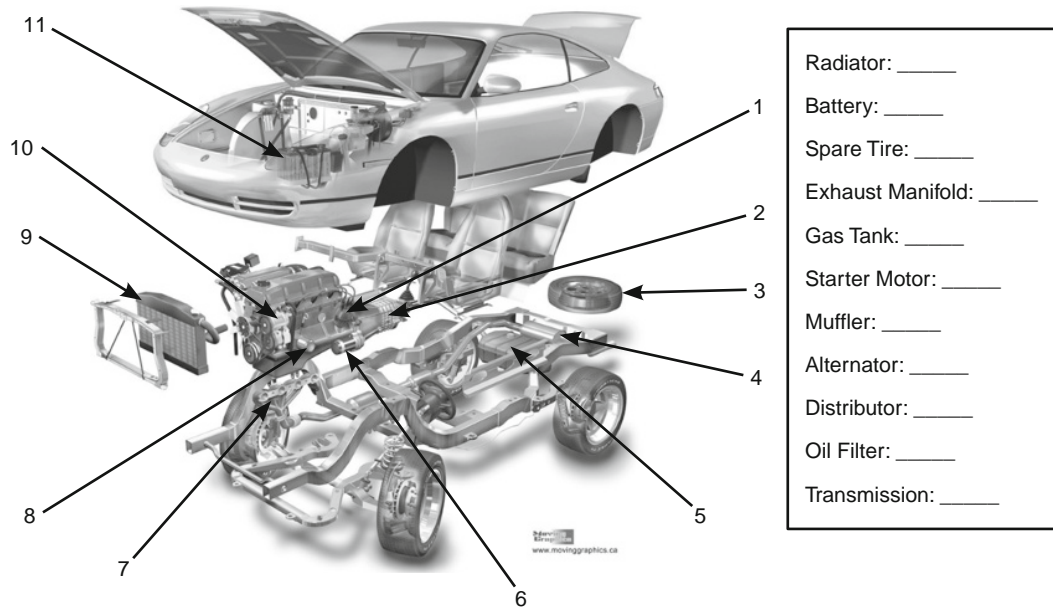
Exploded View of a Modern Automobile. © Moving Graphics
